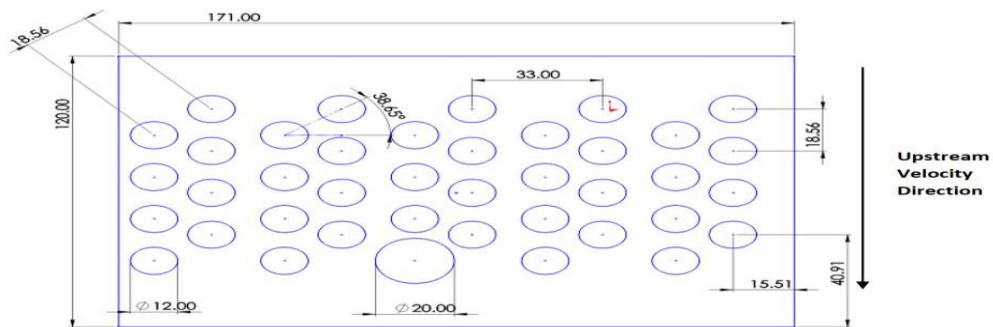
Tube bundle drawing with parallel triangular arrangement with P/D of 1.54
